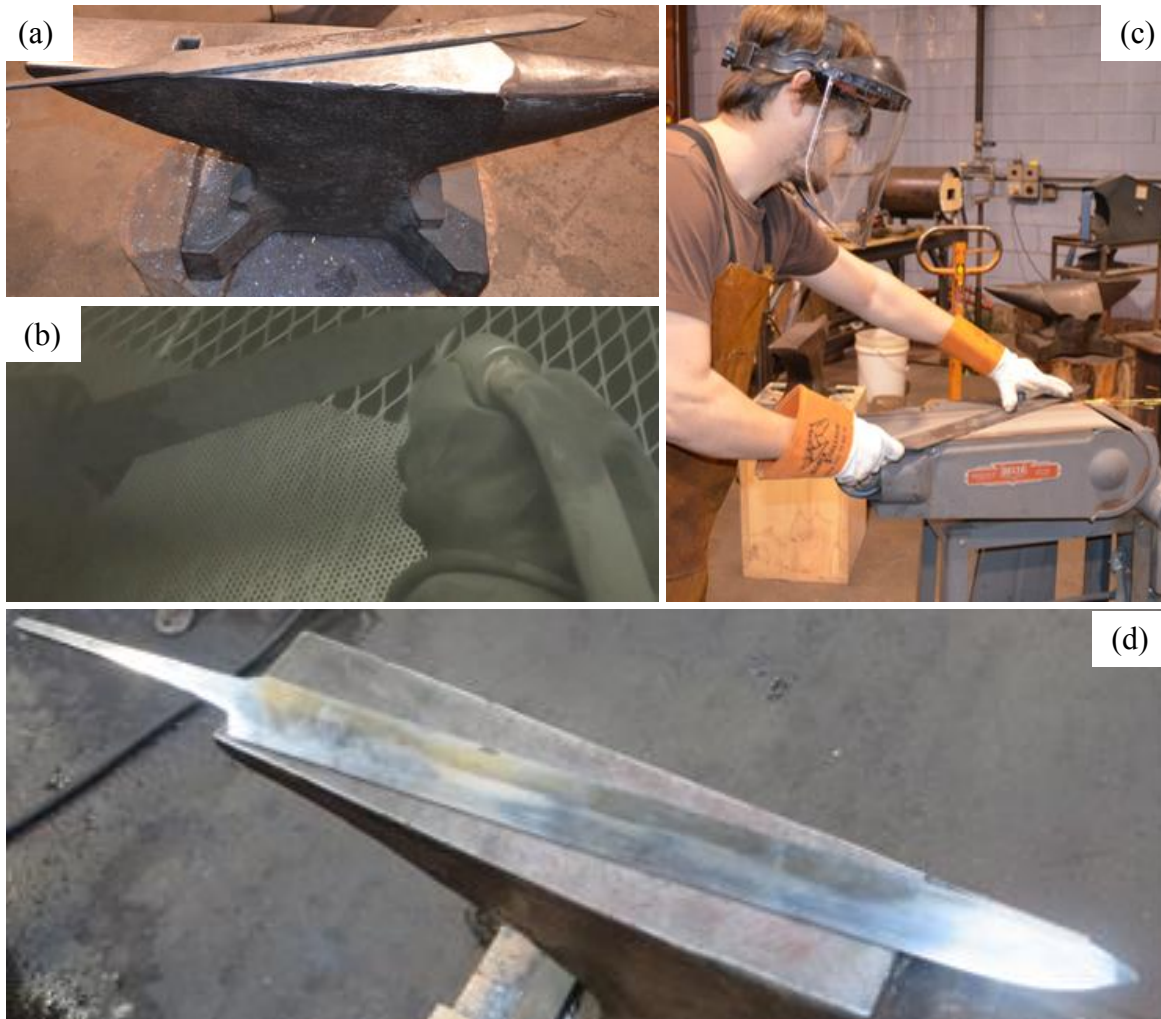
(a) Rough shaped blade; (b) sand blasting the as-forged blade; (c) grinding the blade on a belt sander; (d) and the rough ground blade.
